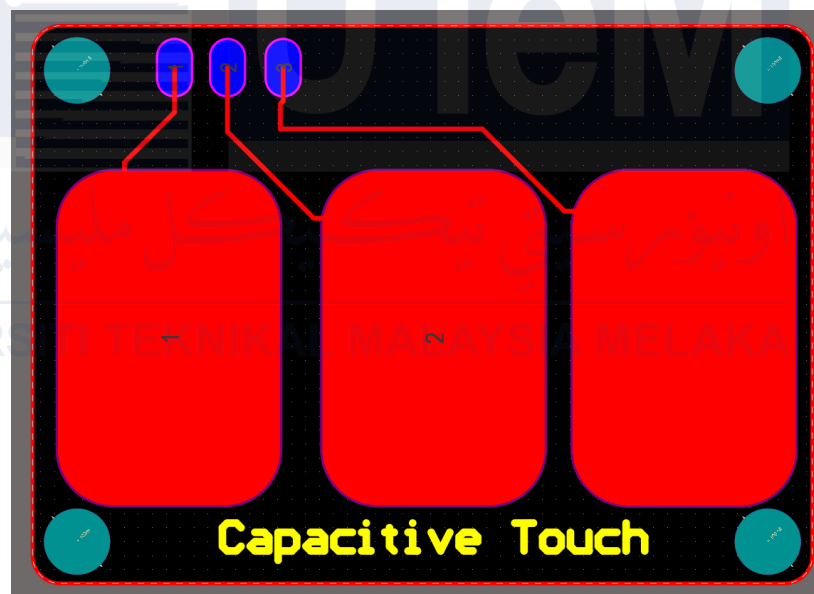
2D PCB Layout (Capacitive Touch Panel)
